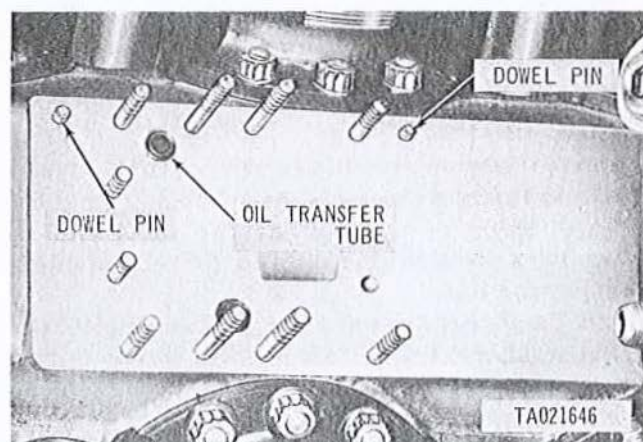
Location of preformed packing on oil transfer tube in crankcase assembly.
